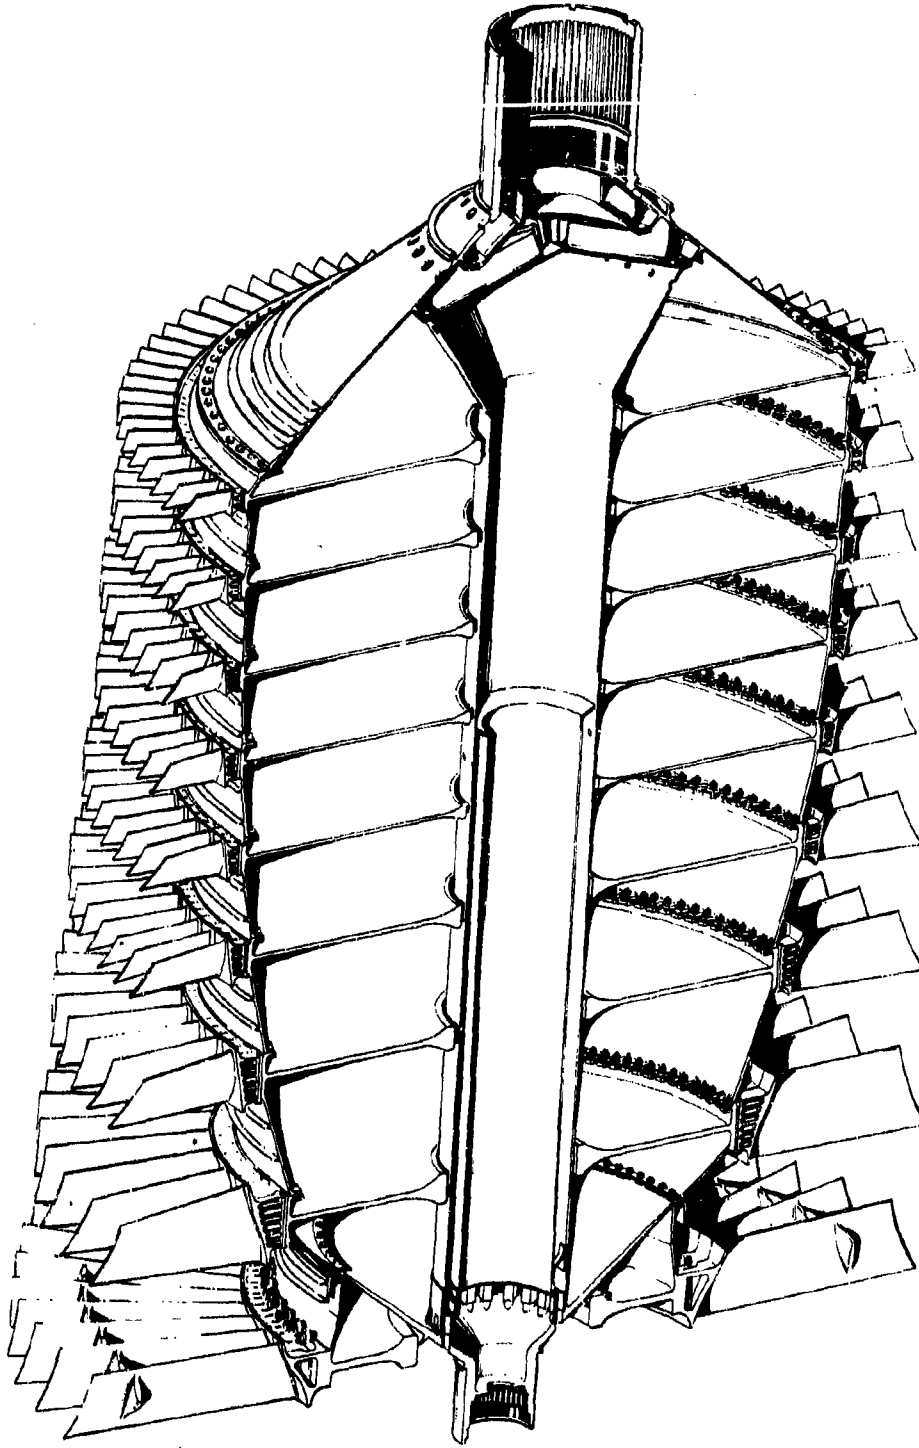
ROTOR CONSTRUCTION, GE4. GE4 Compressor Rotor, Showing
